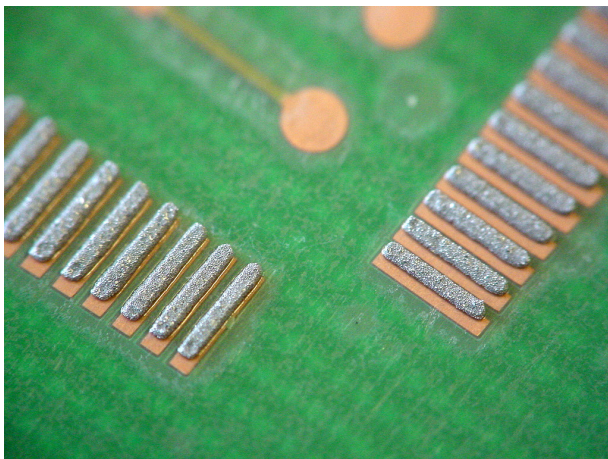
Solder Paste Test Print - showing necessary adjustment.
